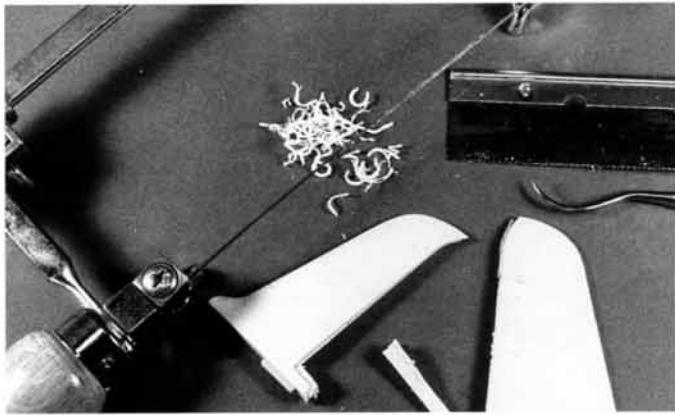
Some control surfaces are stepped and you have to use a combination of scribing tool, a razor saw, and a jeweler's saw. Here again the rudder on this part has been severely damaged, but it will be replaced with a new resin rudder.
